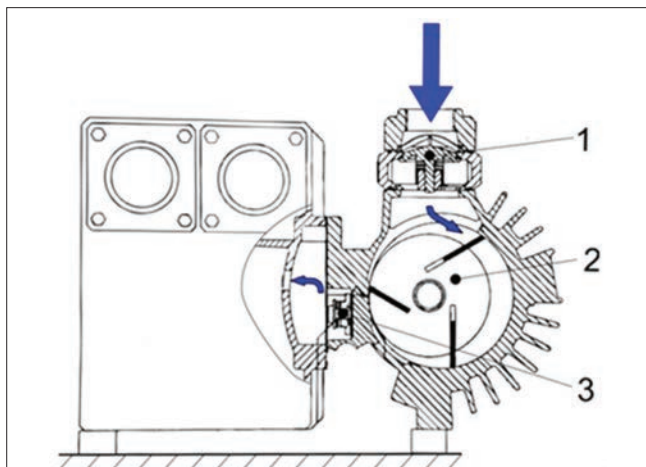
A cross-section of a rotary vane vacuum pump illustrating its principle of operation: 1 – inlet check valve, 2 – impeller with cut vane grooves, 3 – outlet check valve [4]
